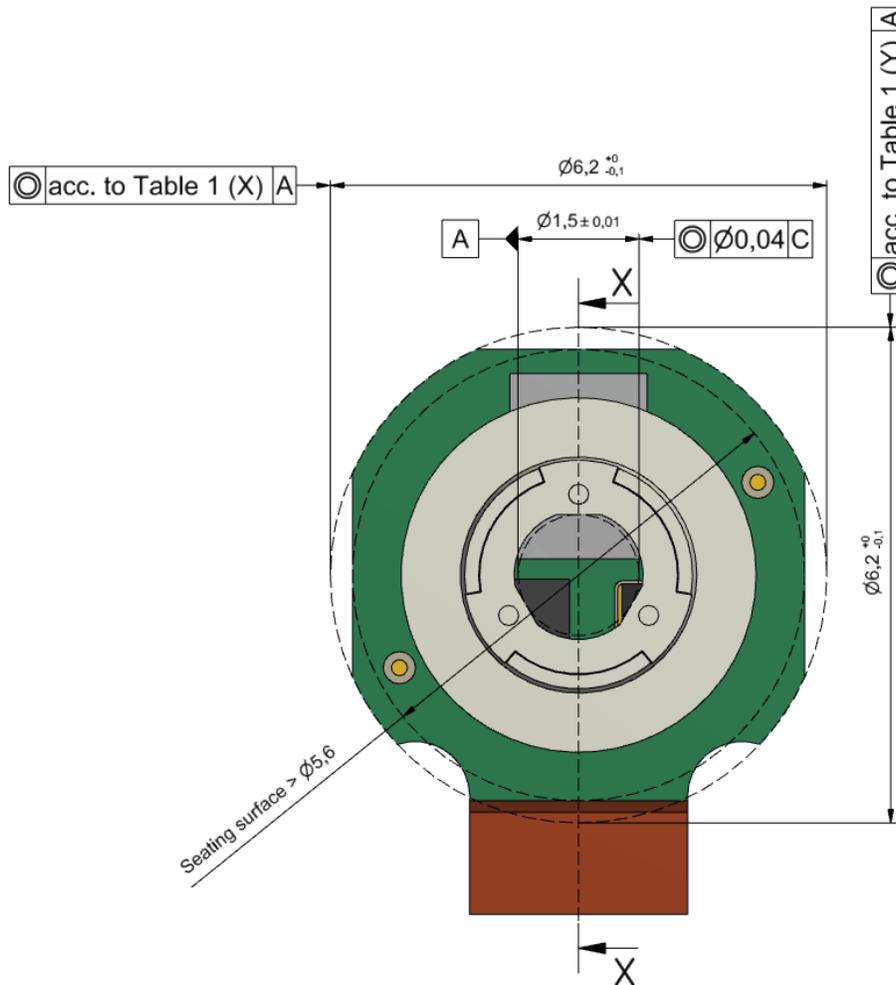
View of assembled state (customer-specific shaft and adapter hidden)
